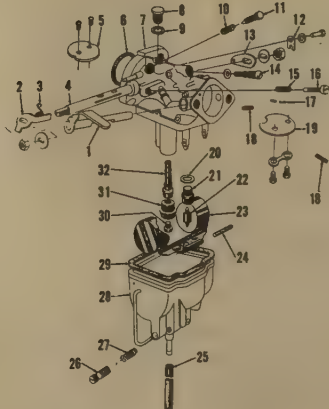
Exploded view of the Keihin float type carburetor used on Honda industrial engines. Refer to Fig. HN1-2 for cross-sectional view of carburetor, and to Fig. HN1-3 for view showing method of checking float level adjustment.
